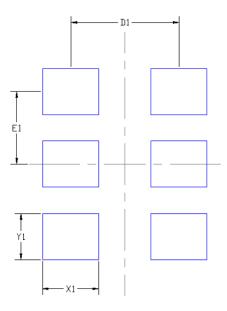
Si560 (2.5×3.2 mm) PCB Land Pattern
